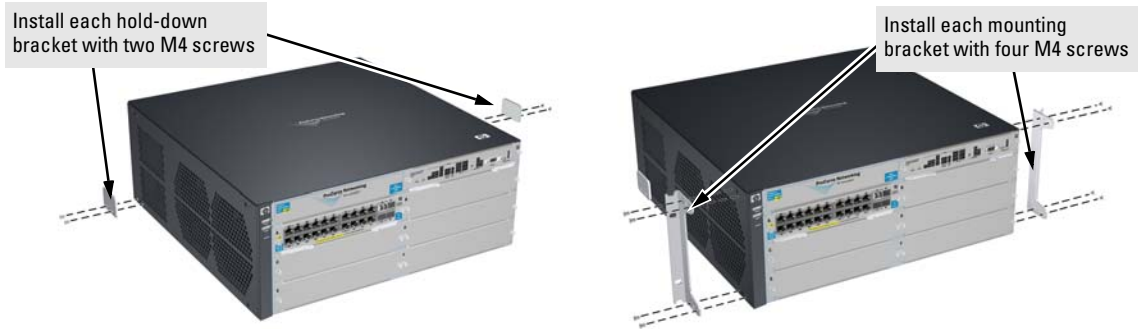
Installing Hold-down and Mounting Brackets on a Switch 5406zl/8200zl
